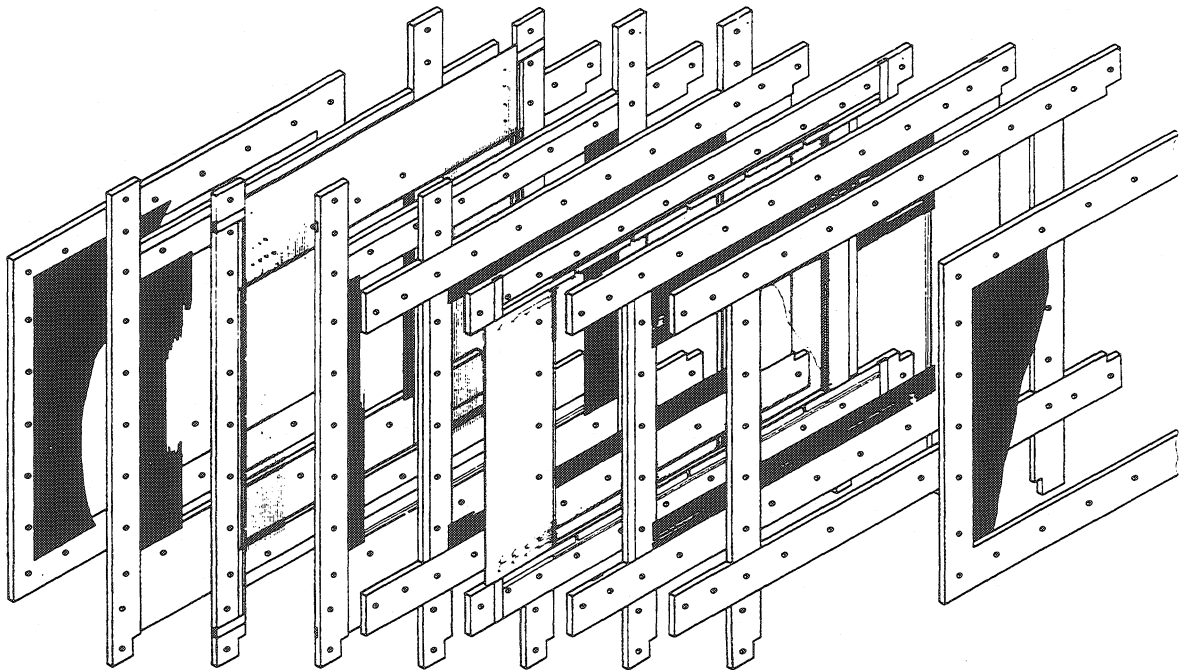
Exploded view of a 2-coordinates multiwire chamber, showing the number and the complexity of the required parts<sup>(5)</sup>.
